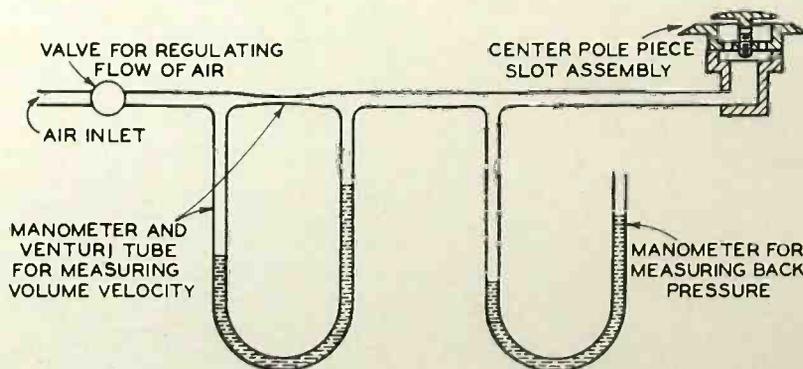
By the use of such a calibrating fixture the center slot assembly can be adjusted to give the proper acoustic resistance
